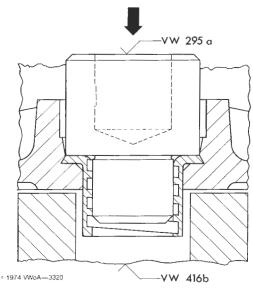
Oil return sleeve being pressed in (arrow). Note that driver VW 295a has caused the claws to engage the casting. Support VW 416b must be used to support the housing as shown.
